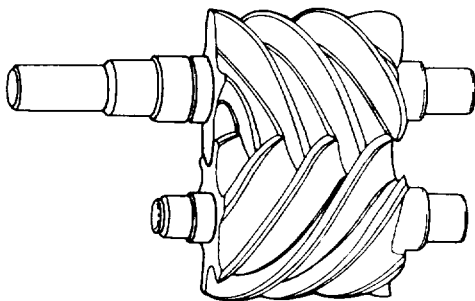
Male and female screw type of air compressor rotors (matched set).
